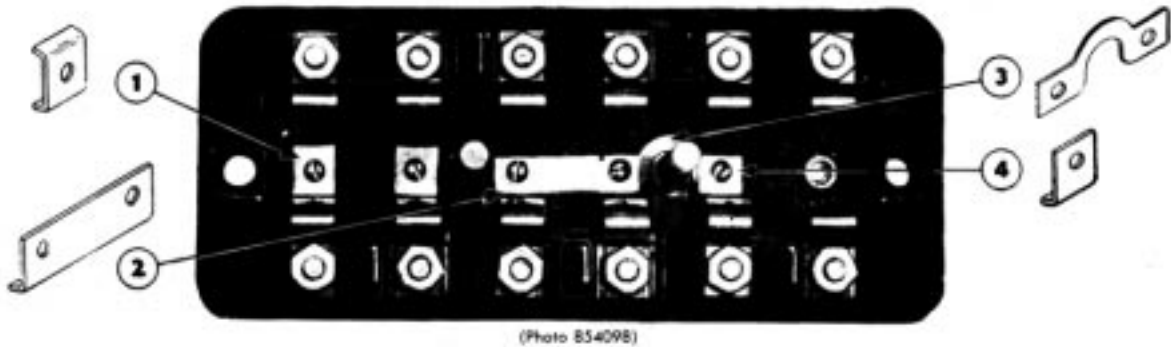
shows a composite assembly of a 6-pole PK-2 test block with auxiliary contacts and jumpers, as follows:
